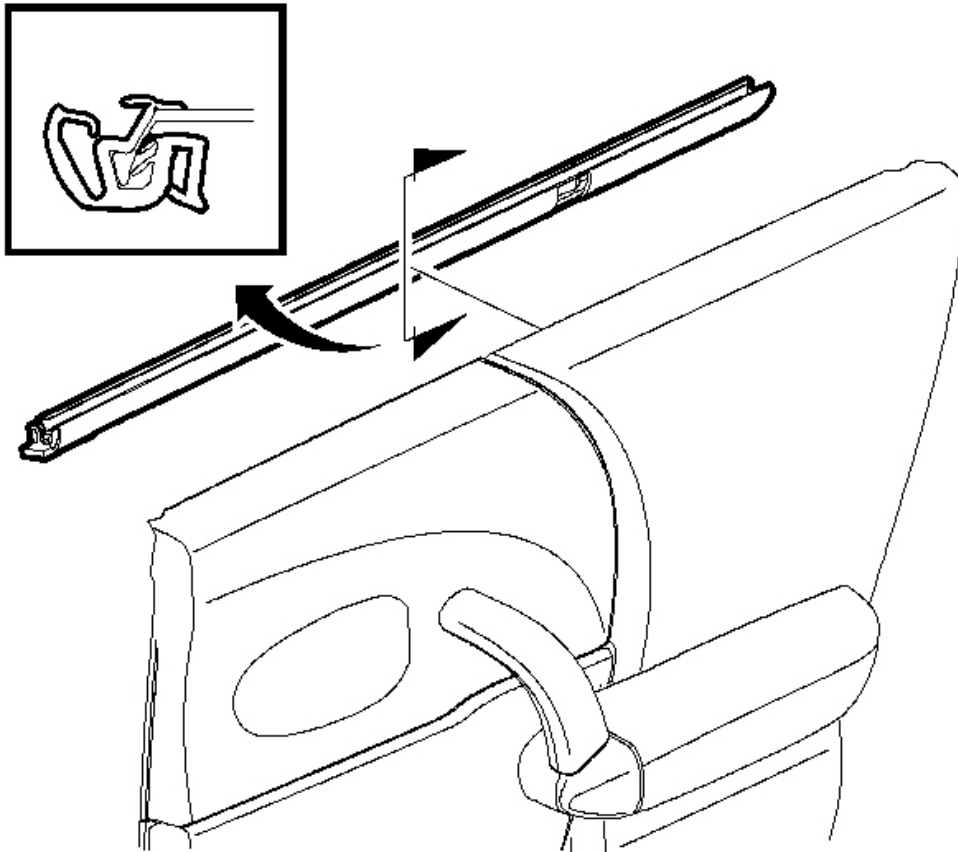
View Of Rear Door Window Inner Belt Sealing Strip
